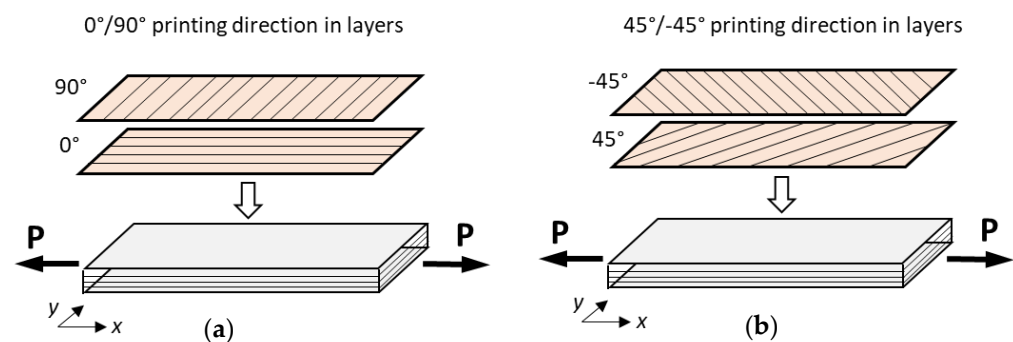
3D-Printed parts for tensile testing (a) cross-ply (b) angle-ply printed laminates.
